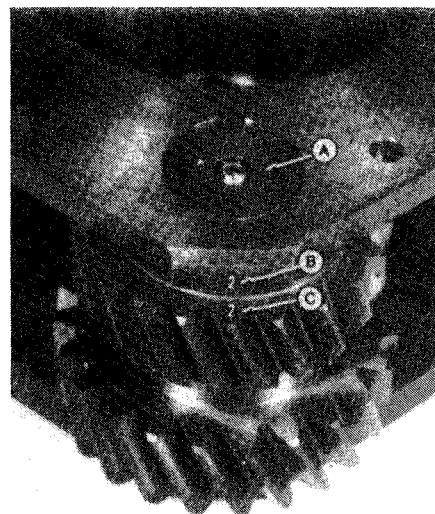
On Model 4450, align stamped number (1, 2 or 3) on carrier (B) with matching number on pinion gears (C).
